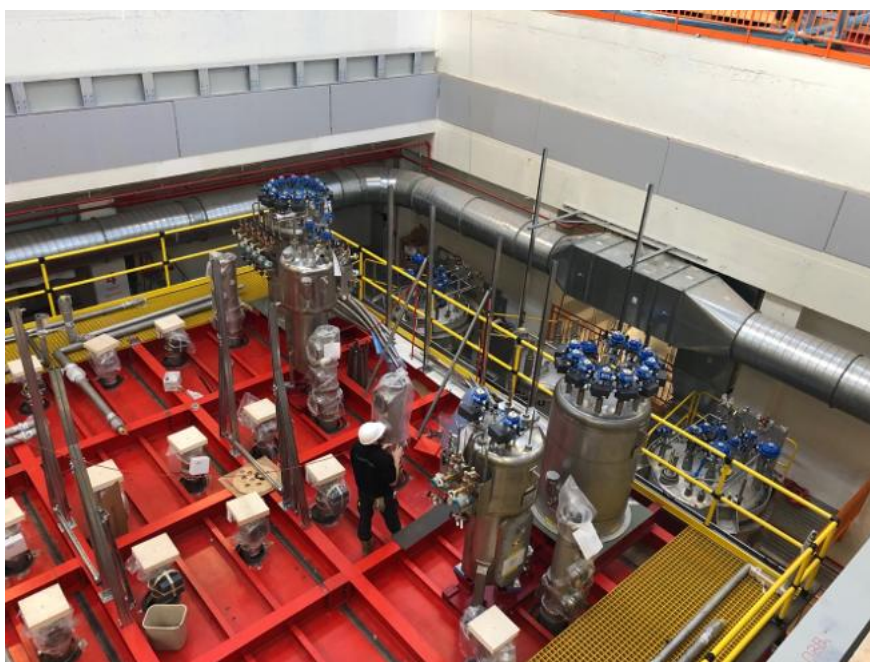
Photograph taken during the installation of the cold shields inlet (right) and outlet (left) valve boxes. In the picture, the visible outlet pipes are yet to be welded to the ones exiting the corresponding valve box.
